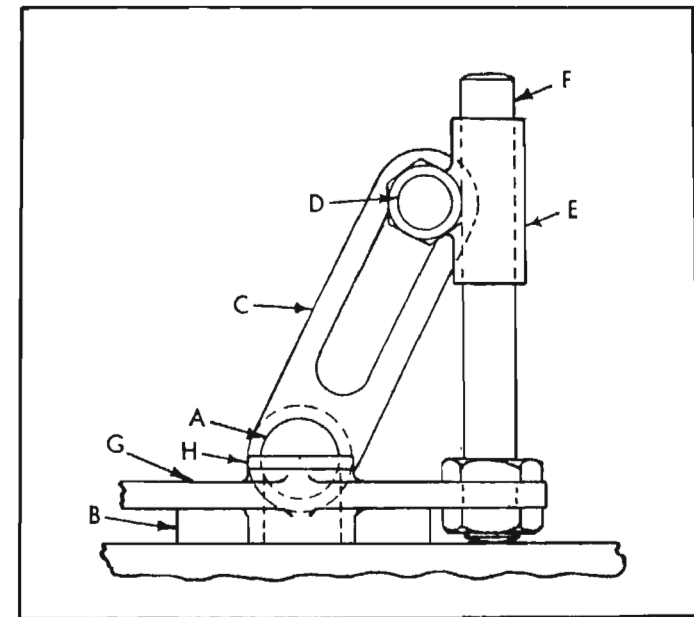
Left-hand End View of Mechanism as Shown in Fig. 14.
